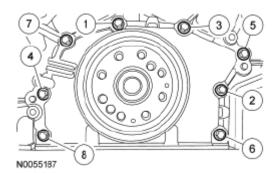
Identifying Crankshaft Rear Seal Retainer And Bolts Courtesy of FORD MOTOR CO.
